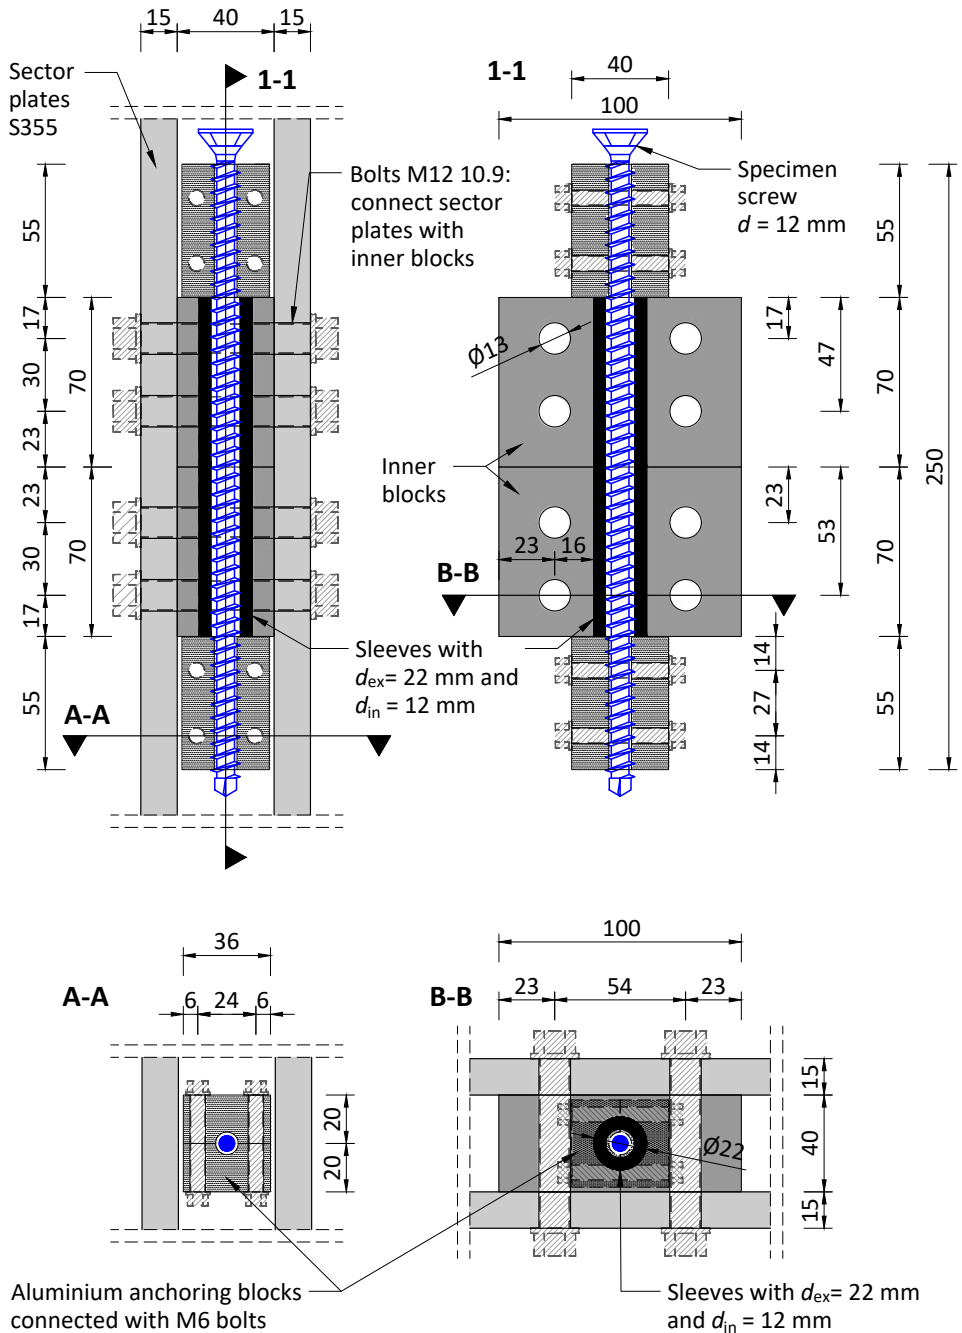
Schematic test setup with detail in the centre on an exemplary screw with $d = 12$ mm for tension, shear and combined tension and shear forces, top views of bolts are not shown, in mm.
